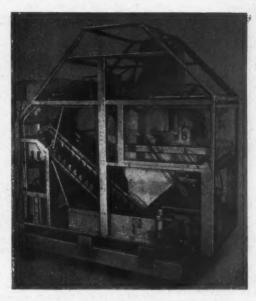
A recently-built batch-type automatic vibratory finishing machine is here shown without the enclosing covers
